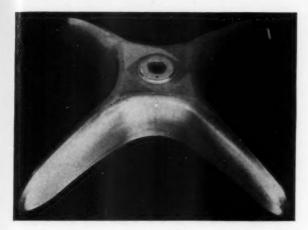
Swivel chair base fabricated by brazing aluminum alloy castings and sheet.
